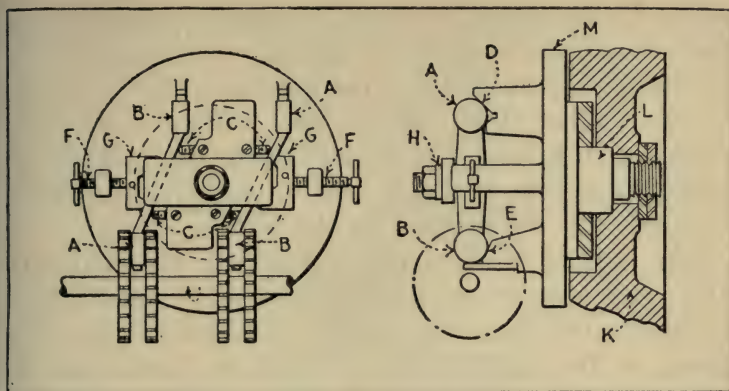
DOUBLE INDEXING FIXTURE FOR STRADDLE MILLING LEVERS
